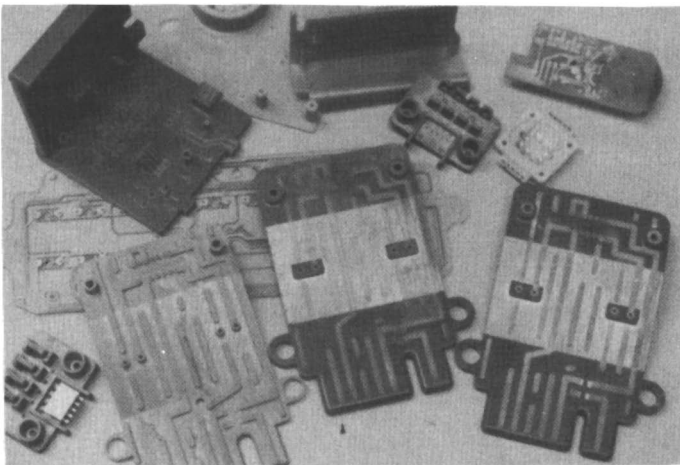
3-D Molded Interconnects feature unique shapes/forms.
